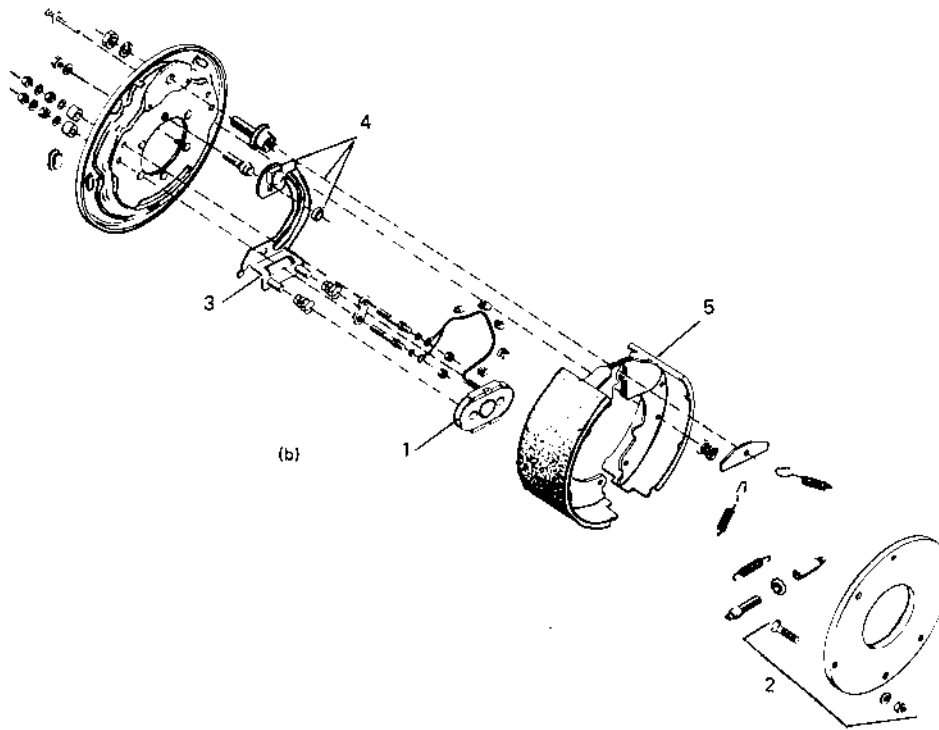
Exploded view of the components of the electric brake shown in [Figure 18](#). (Courtesy of Warner Electric Brake & Clutch Co., South Beloit, IL.)
